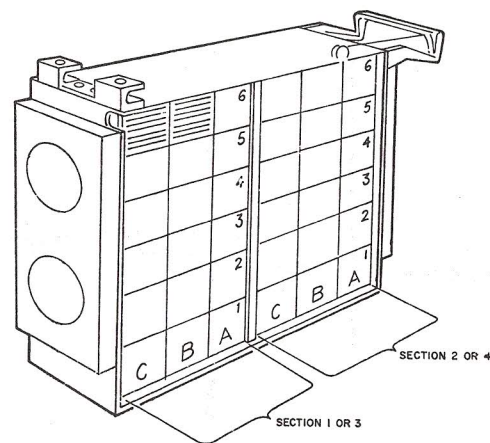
Option Logic Tilt-Out Drawer Assembly (Pac Side)
